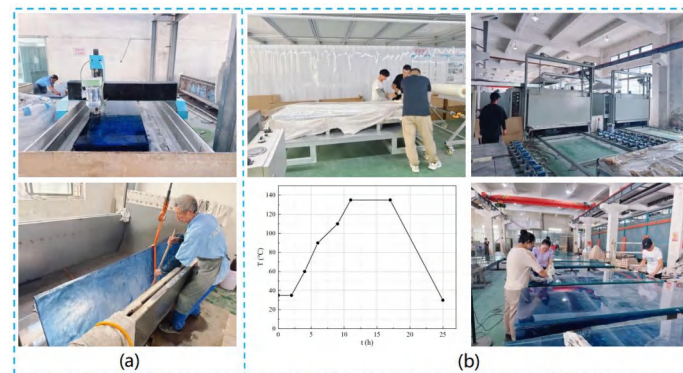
Machine Grinding Back Surface and Fine Grinding Corrugated Surface
